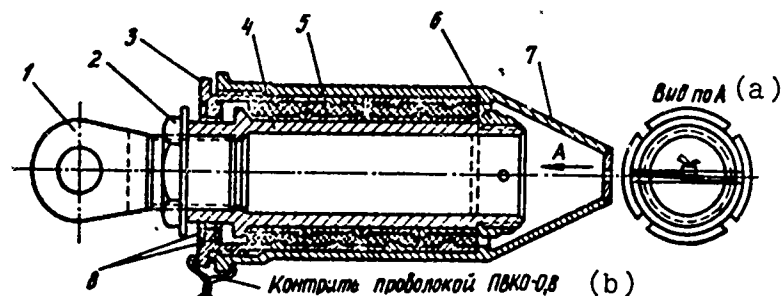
Shock absorber of mount, installed on aircraft from the 57 series: 1 - forked bolt; 2 - lock nut; 3 - tightening nut; 4 - rod; 5 - shock absorber; 6 - stop; 7 - sleeve of mount; 8 - washers, glued with No. 88 glue.
